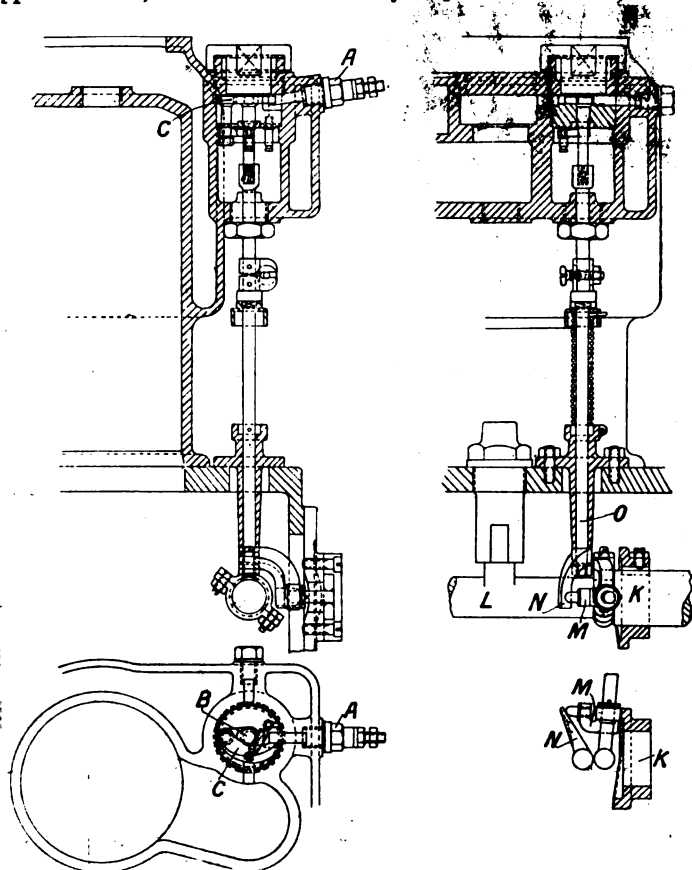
Details of Make and Break Mechanism of Low Tension Magneto Ignition of Britannia Cars.
